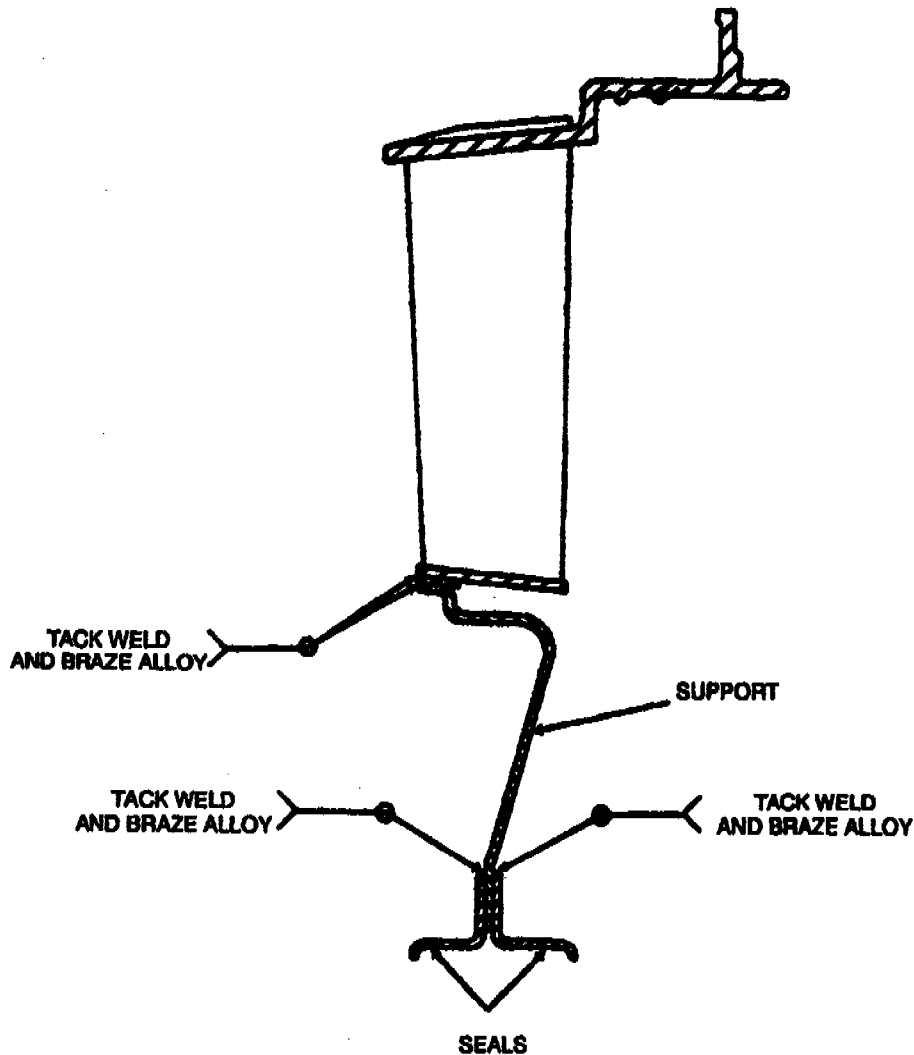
Tack-Weld and Braze Alloy Locations.
